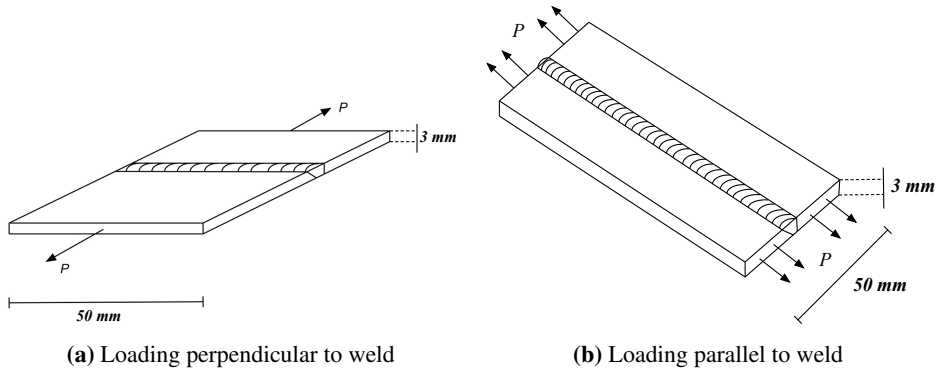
Assumed dimensions of the AA6082 sheets subsequent to GMA and FS welding, where the loading is perpendicular and parallel to the weld, respectively.
